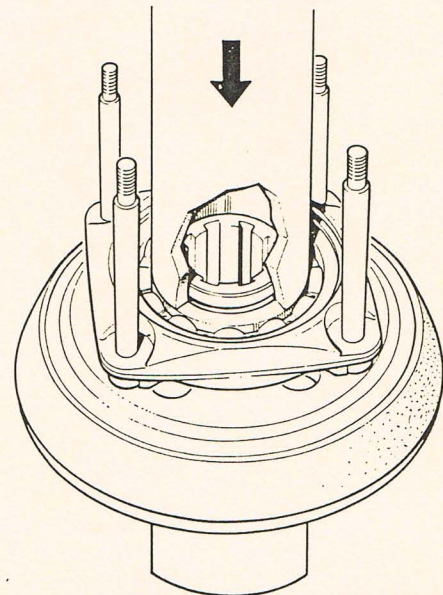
RE-ASSEMBLY OF SLIDING MEMBER
